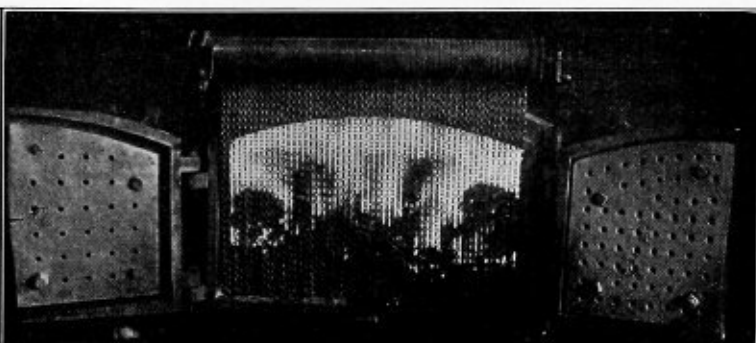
Furnace Doors Open; Chain Screen Lowered
